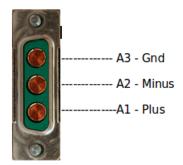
Soldering the Female 3-PIN D-sub(15) Connector to the Power Cable
